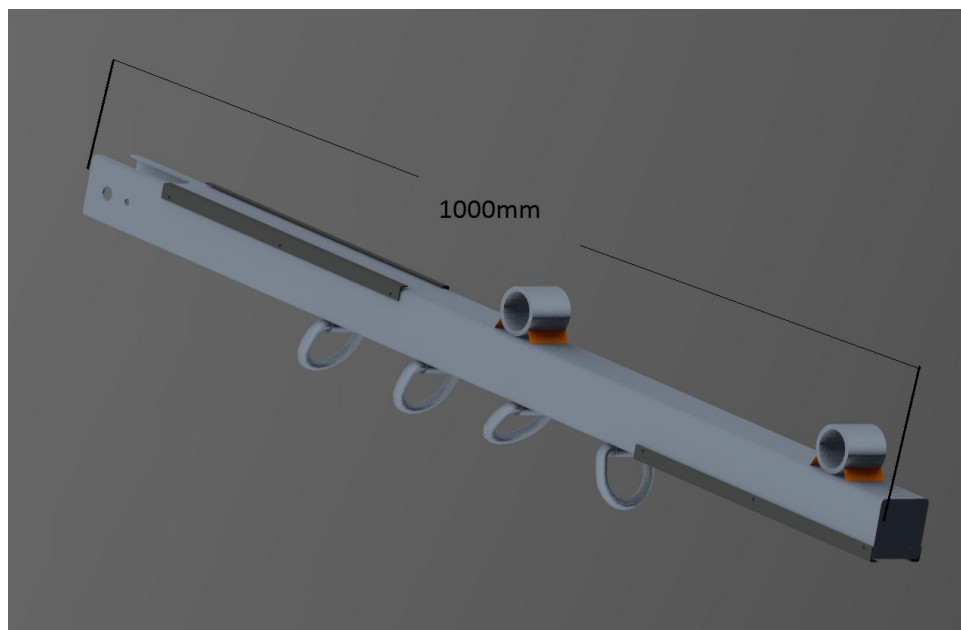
Arm beam with D-ring, foam pad holder and rod holder.
